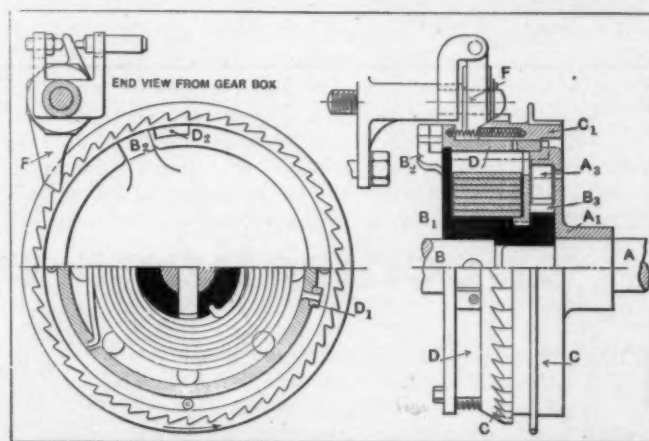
Sectional view of Goodhart engine starter, an English invention
